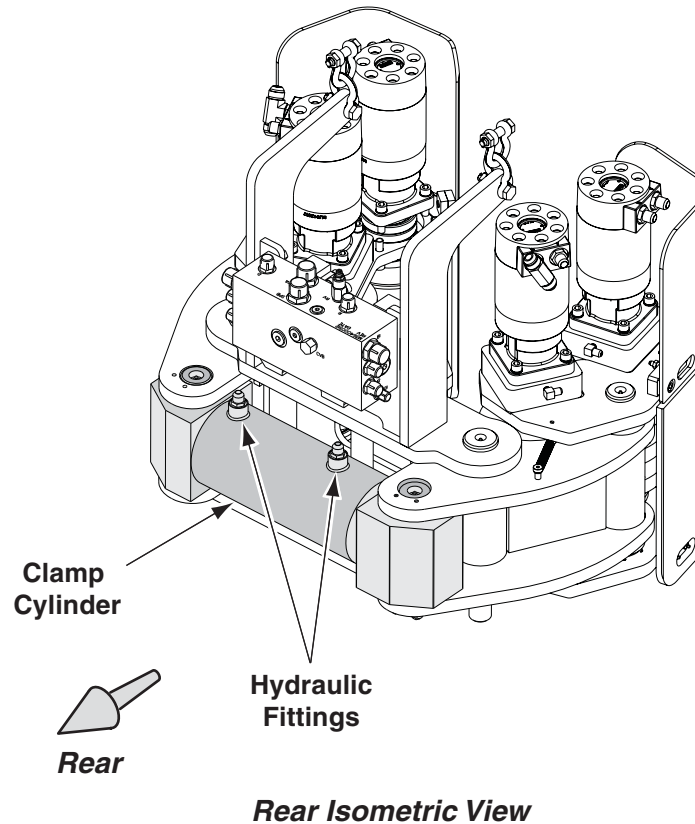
Open Spin Wrench if Hydraulic Failure Occurs
